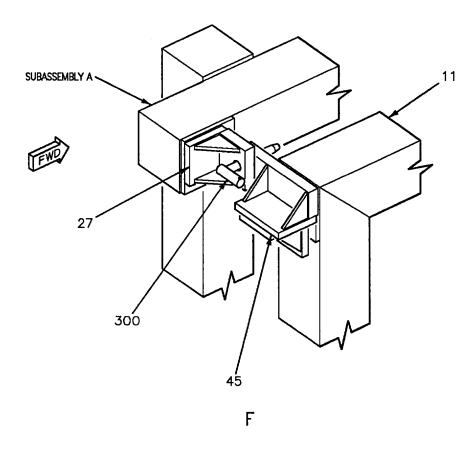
Assembly of Frame and Subassembly A (Sheet 4)
